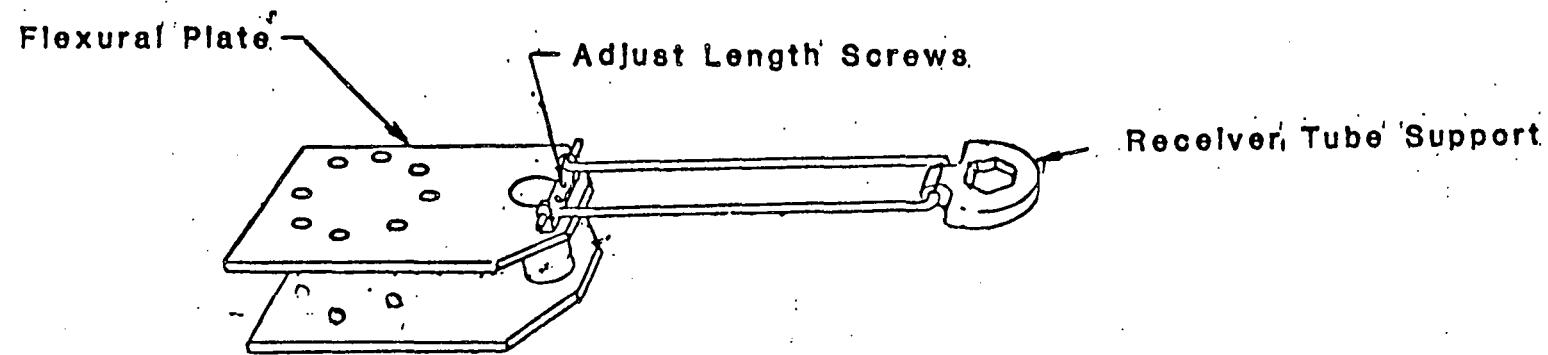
ASSEMBLY FIXTURE TO ESTABLISH FOCAL LENGTH.
